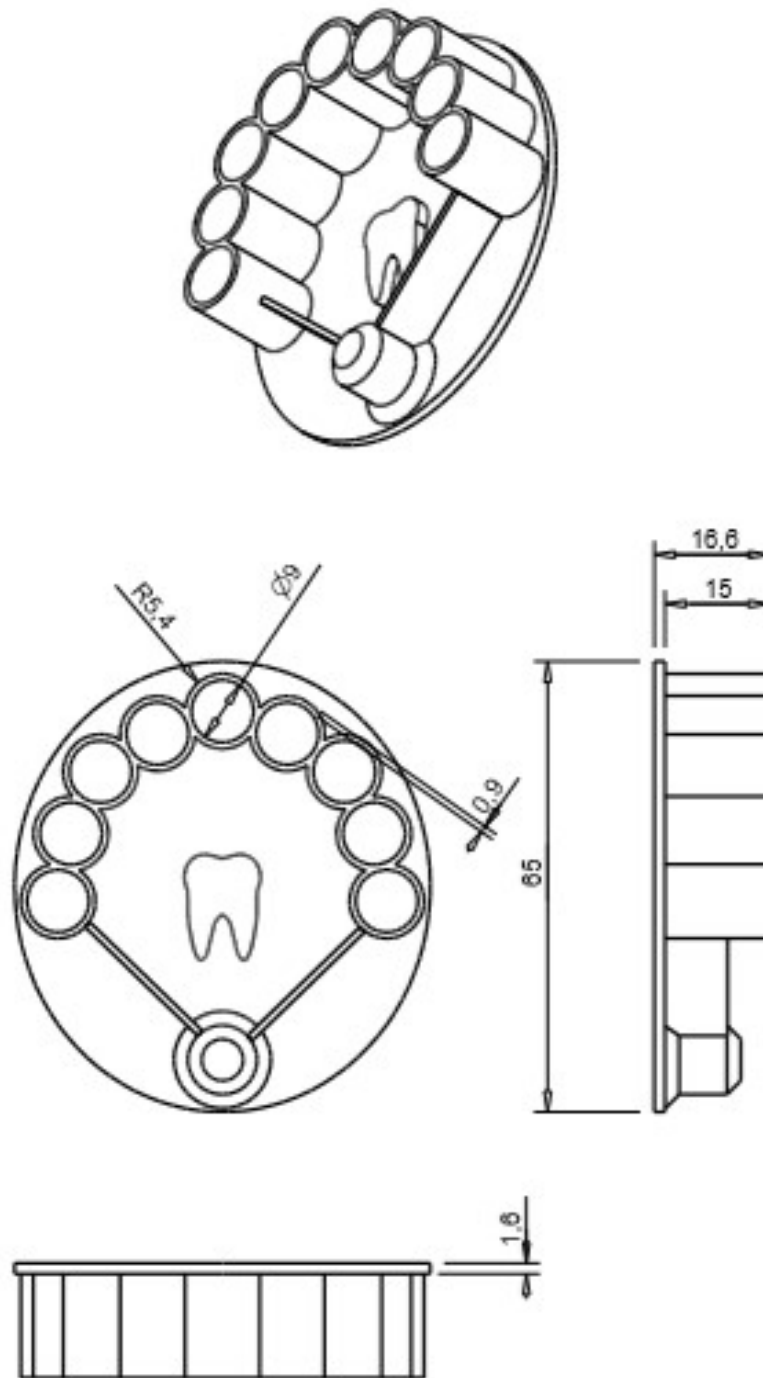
Computer-aided design drawing of the plastic holder. The holder can be used to fix teeth in place for CBCT imaging. All dimensions are given in mm. R = radius. The drawing was designed in collaboration with another thesis supervised by Prof. Dr. Marc Schmitter.
